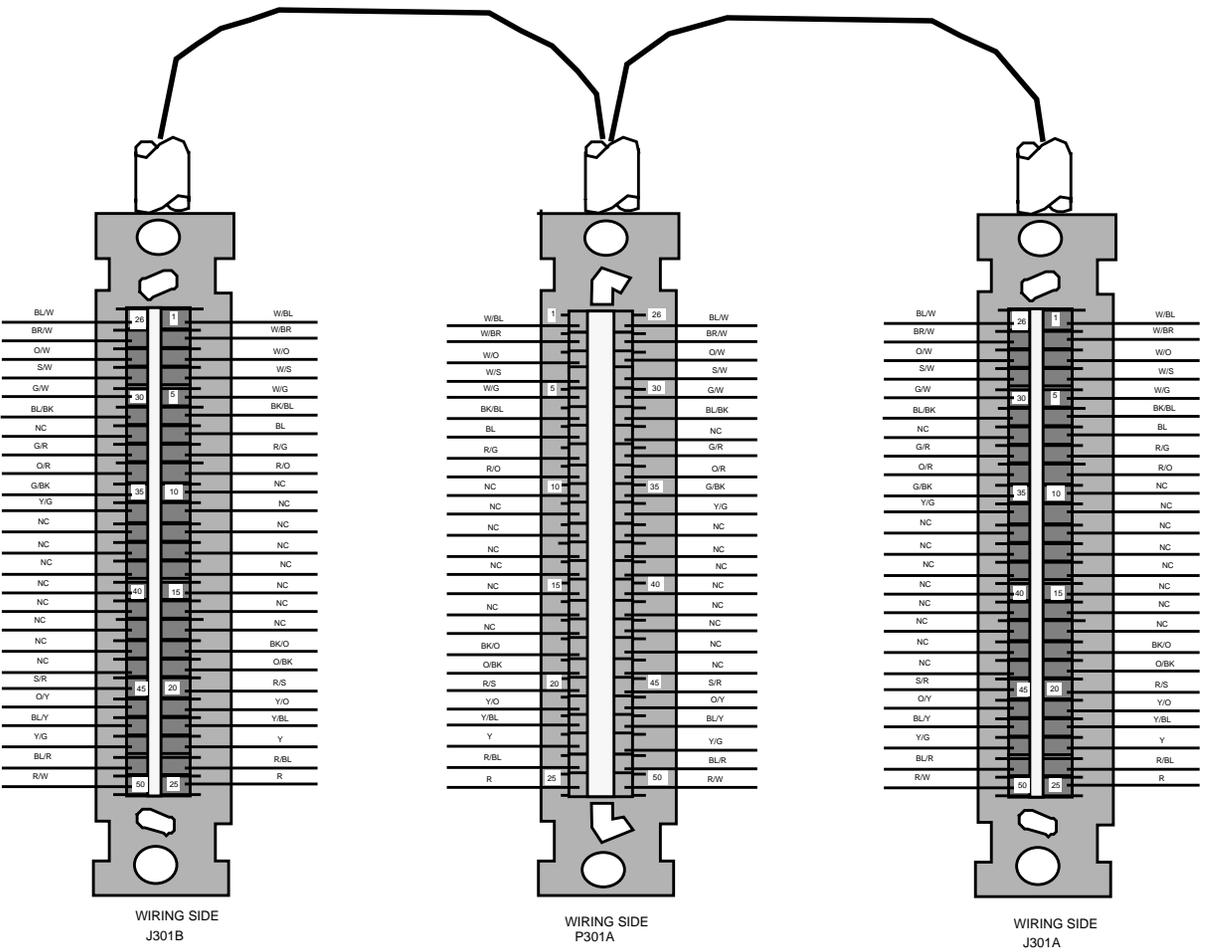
Cable Assembly ED7C723-34 Group 14
